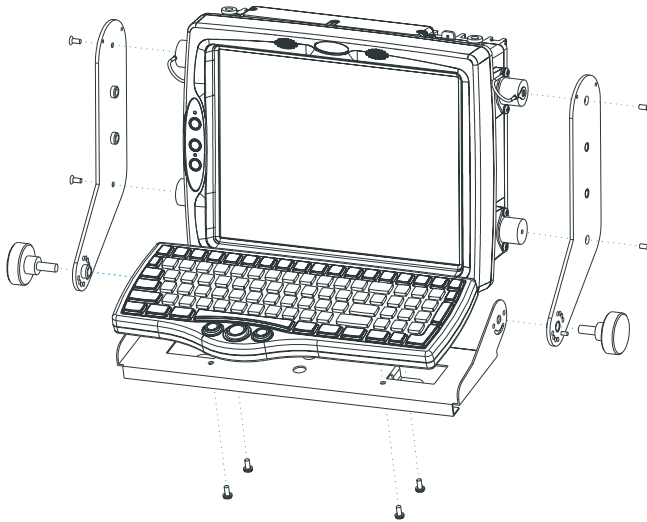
Attach Side Mounting Brackets and Keyboard to VX5
